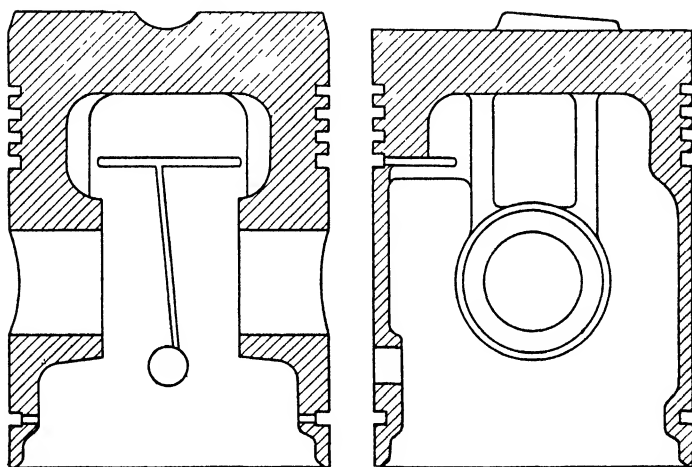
TWO SECTIONS OF AN ALUMINUM-ALLOY DIESEL PISTON.
